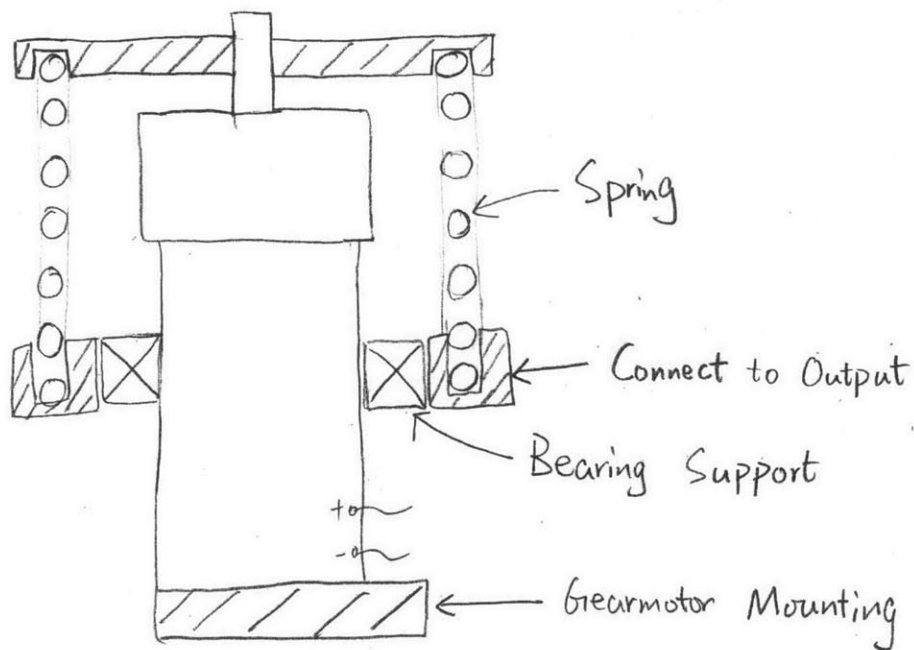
Spring packaging design concept 2: spring packaged over the driver motor. This design concept eliminates the separate space of the spring thus it is suitable for tight packaging.
